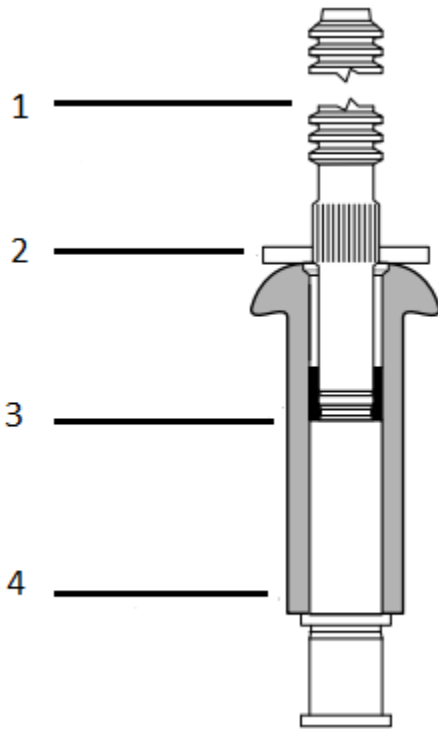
The four major components of a blind rivet deform and/or shear to form a solid connection. [3]
